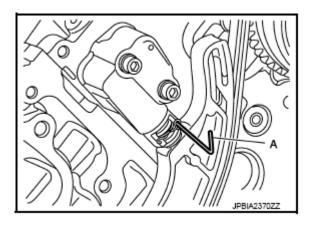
Inserting Stopper Pin Into Body Hole Courtesy of NISSAN NORTH AMERICA, INC.
